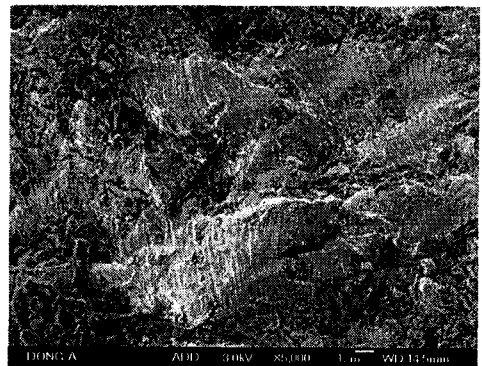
SEM photographs of fatigue crack growth stage at rocker arm shaft
